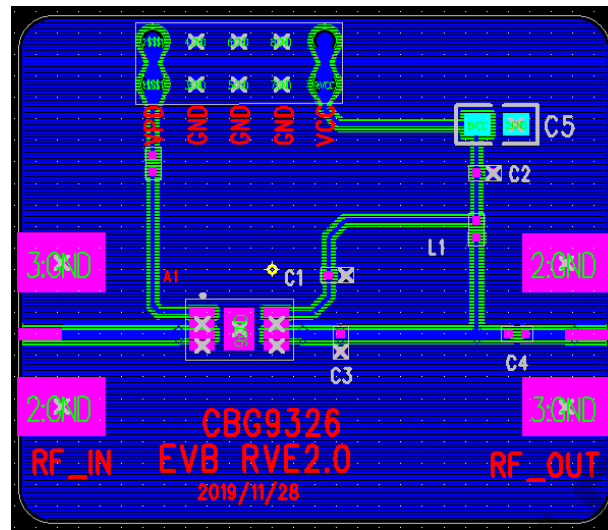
CBG9326 Evaluation Board Assembly Drawing
